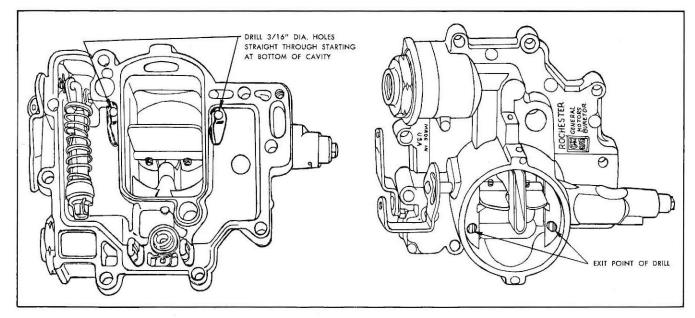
Corvair Carburetor Modification to Improve Hot Idle
